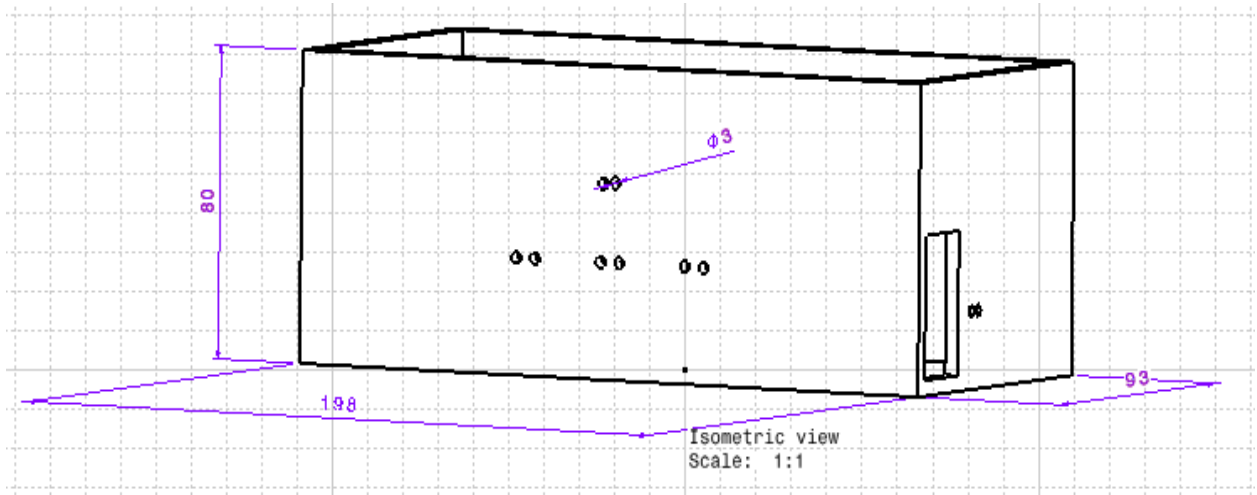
Shows the 3D printed enclosure which housed the electronics and batteries.
